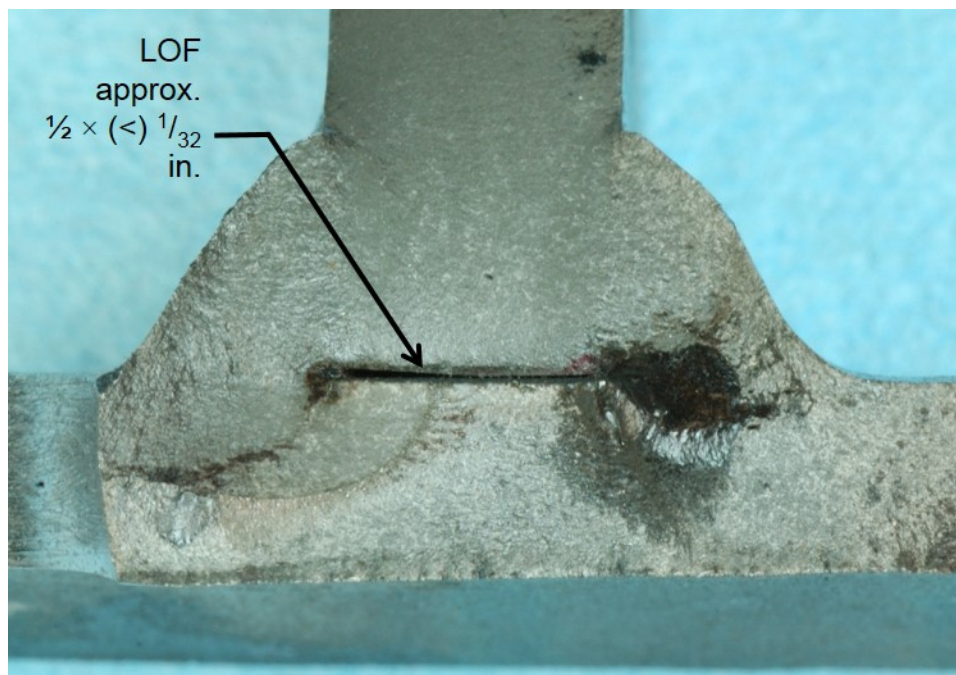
Fracture surface photographed perpendicular to the camera to clarify the LOF — crack to the south of rib in MU2
